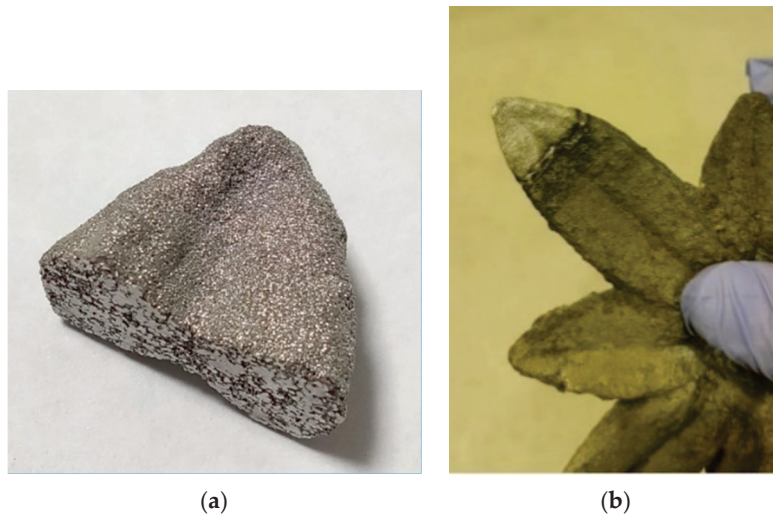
(a)—DMLS printed star ray; (b)—welded star ray.
